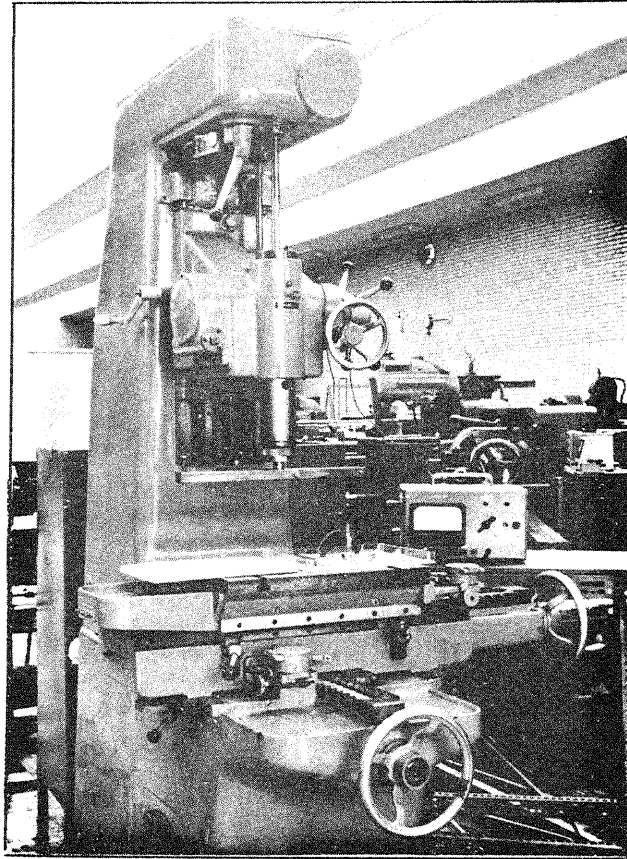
STATIC FIELD PLOTTING EQUIPMENT ON NEWALL JIG BORING MACHINE
